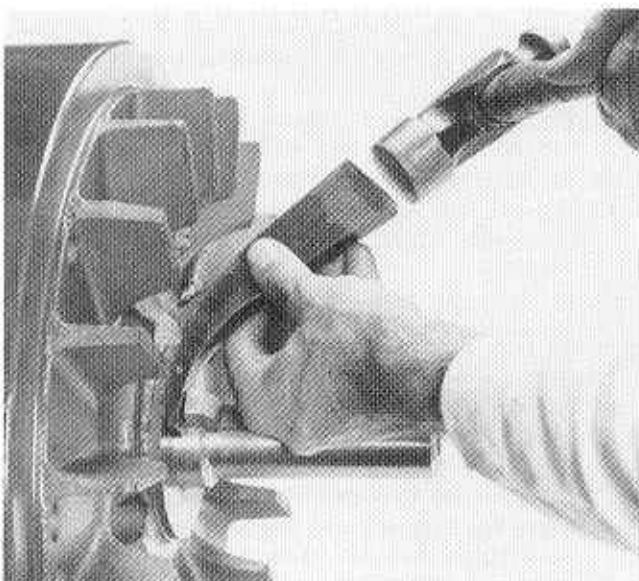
Removal of Flywheel Key Using a Tapered Key Drift.
